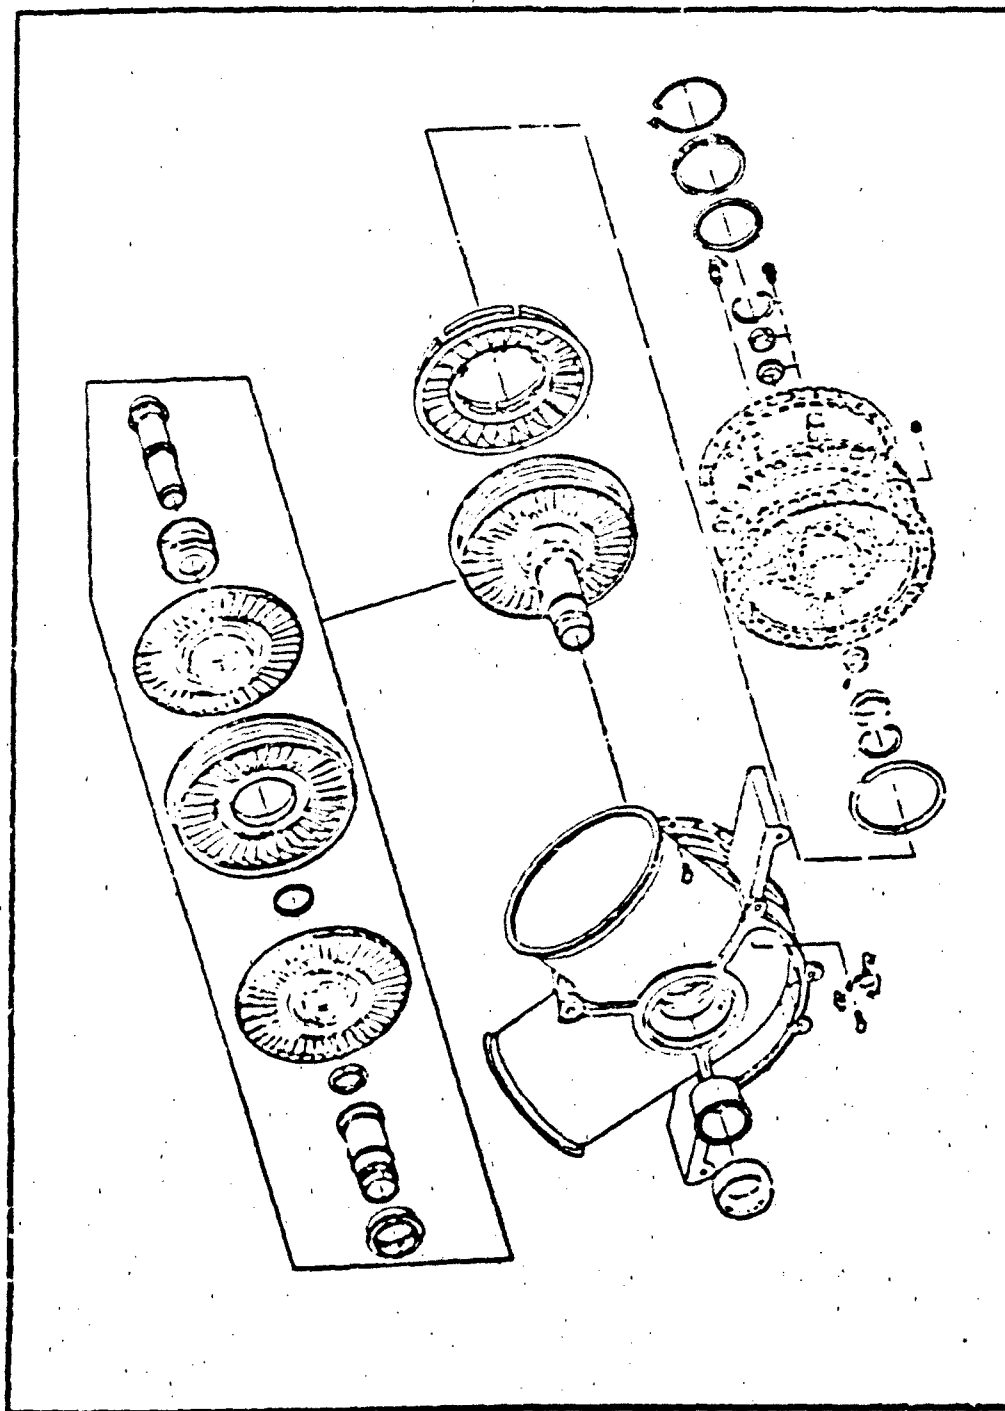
Turbine Assembly, Gas (Power Turbine Rotor and Related Parts)
